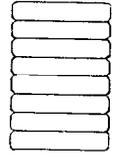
ENLARGED SECTION THROUGH LAMINATIONS, SHOWING THE CHAMFERING.
